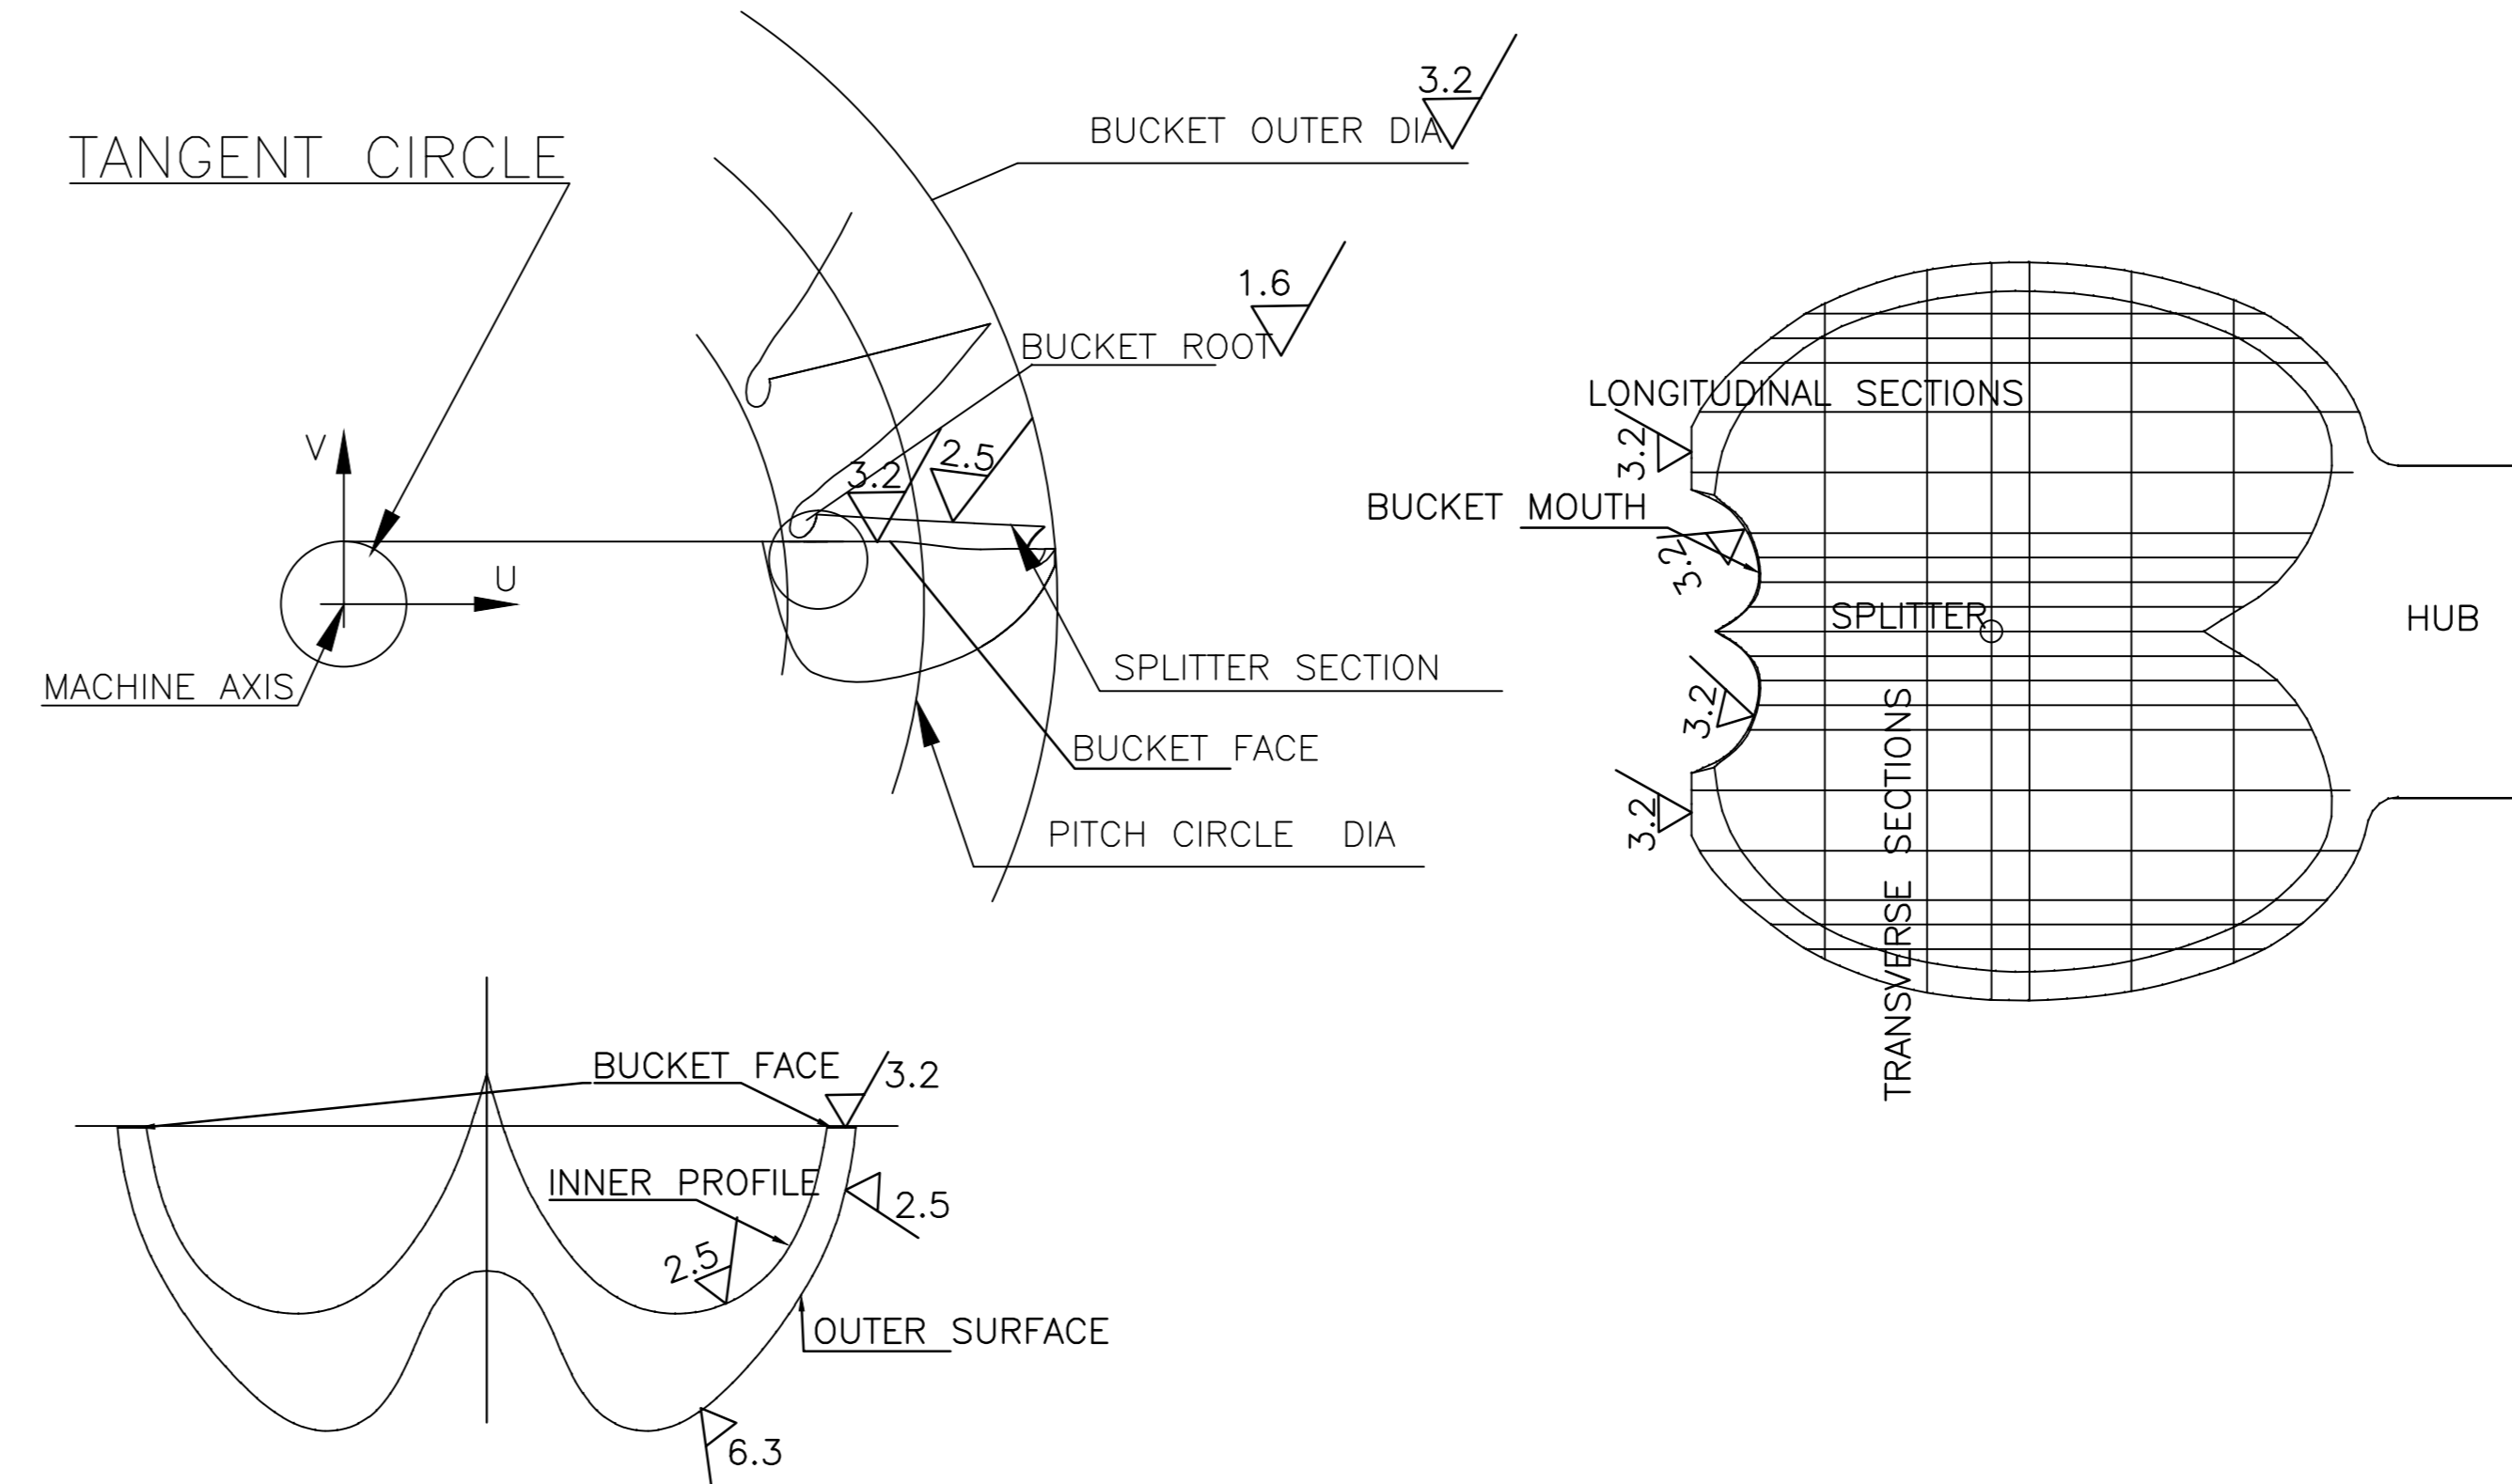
DETAILS OF SURFACE FINISH OF PELTON RUNNER BUCKET
